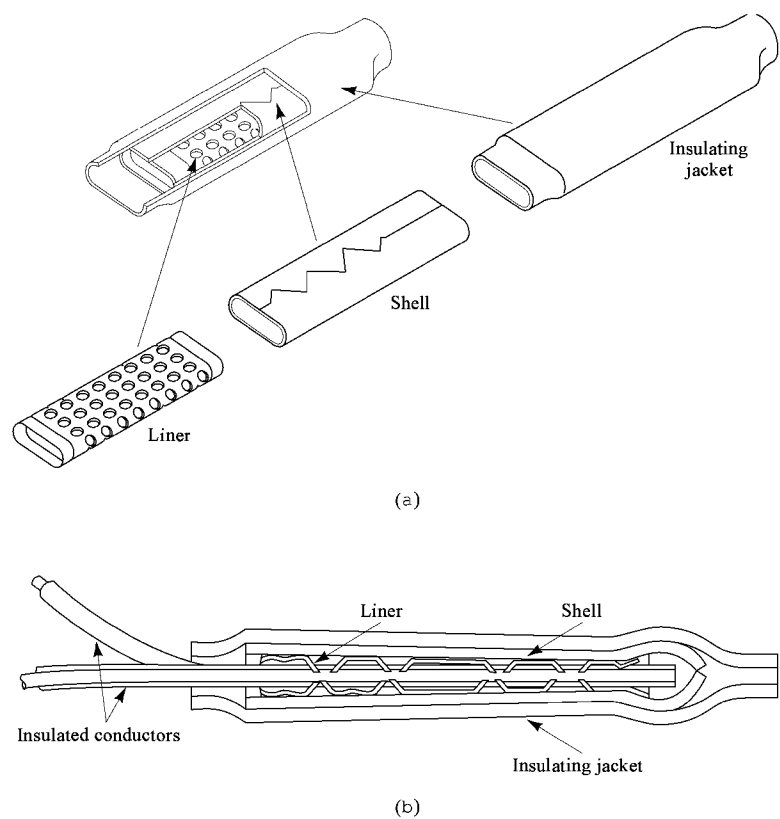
Splicing connector for two wires (insulation piercing). (a) Exploded view; (b) cross section after pressing on wires.
